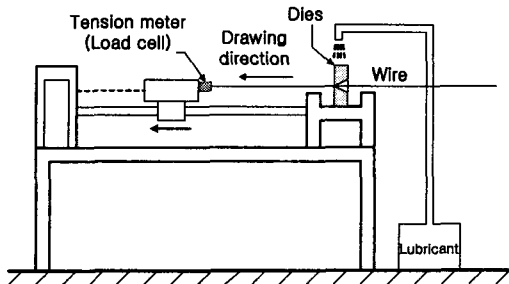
Schematic drawing of test machine for lubricant between wire and dies
